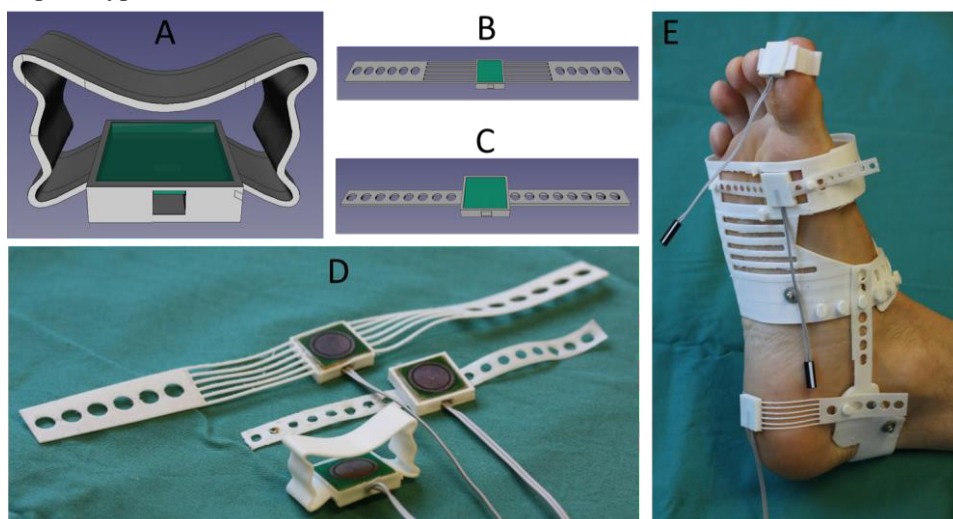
CAD design of sensor parts for skin impedance measurement at the big toe (A), toe ball (B) and heel (C). The 3D printed parts for sensor housing are shown in D, and all parts connected to the foot are shown in E. s
